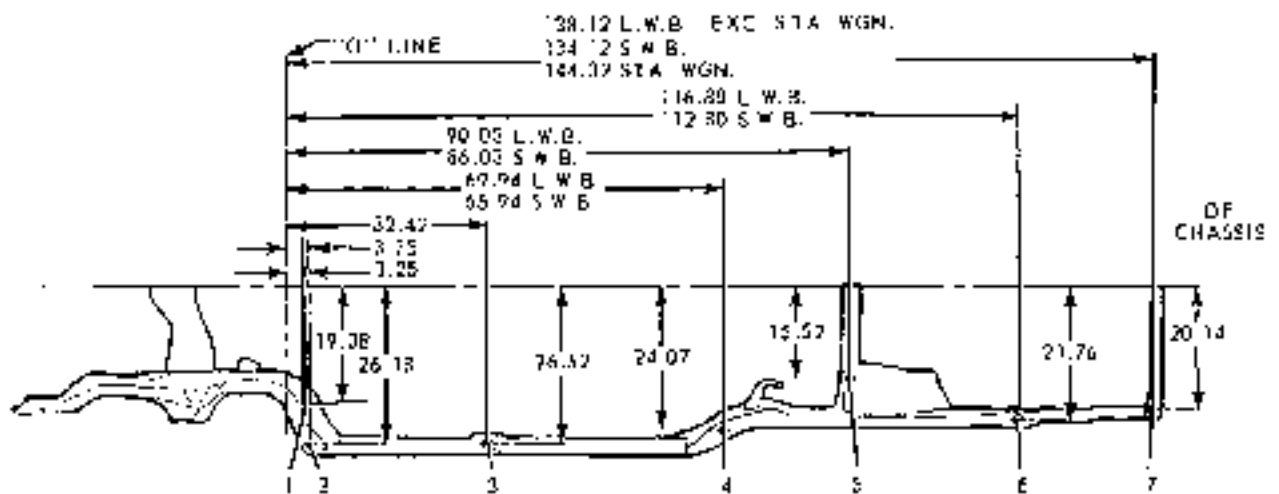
Pontiac Body Bolts and Frame Gauge Line Dimensions
